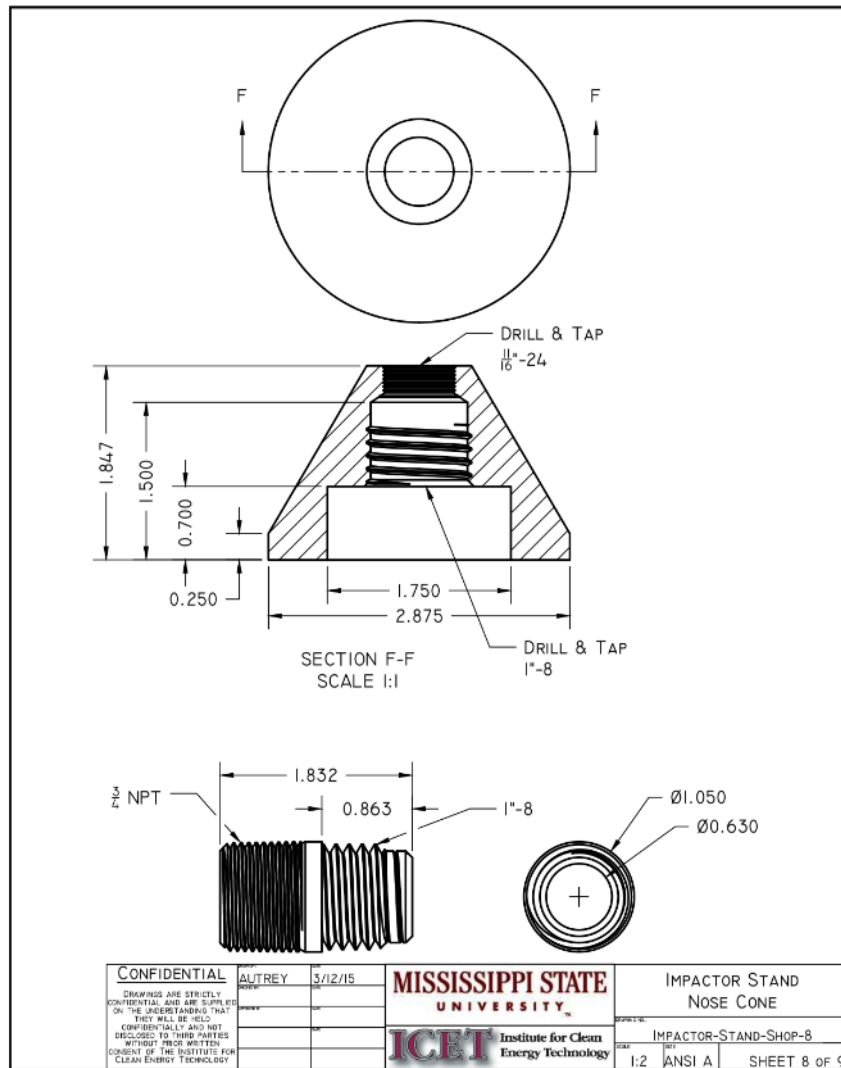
CAD drawing of the Pilat impactor nose cone.
